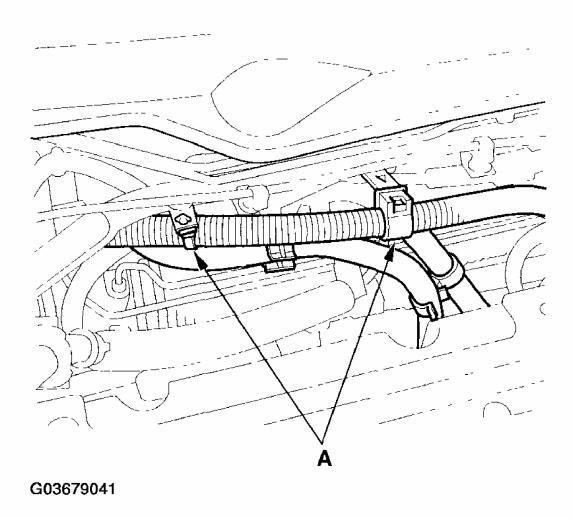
Reinstalling Clip To Mounting Brackets Courtesy of AMERICAN HONDA MOTOR CO., INC.
